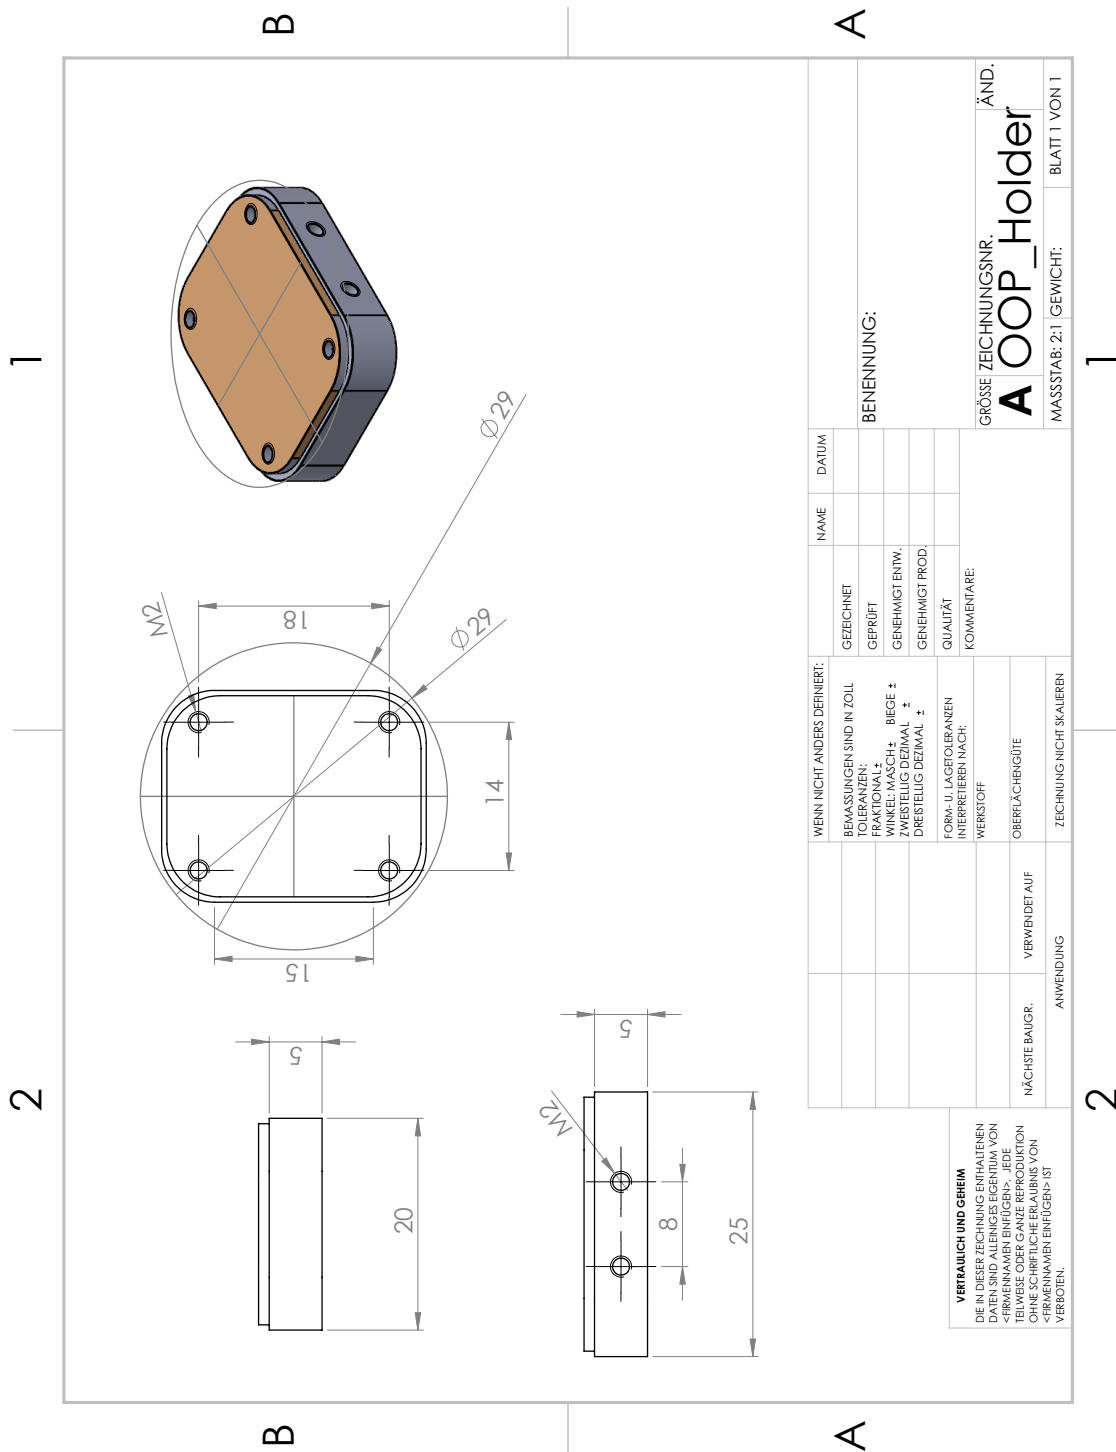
Dimensions of the stripline holder for out-of-plane FMR measurements with the second sample rod. The brown part represents a sketch for the stripline dimensions.
